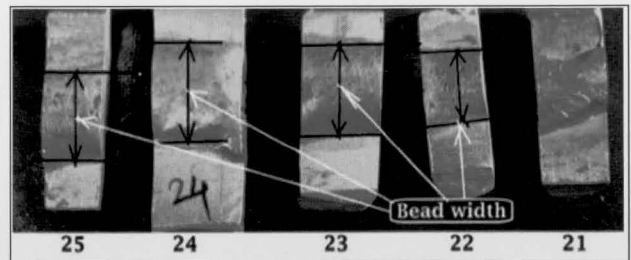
Bead width at welding speed of 130 mm/min.
